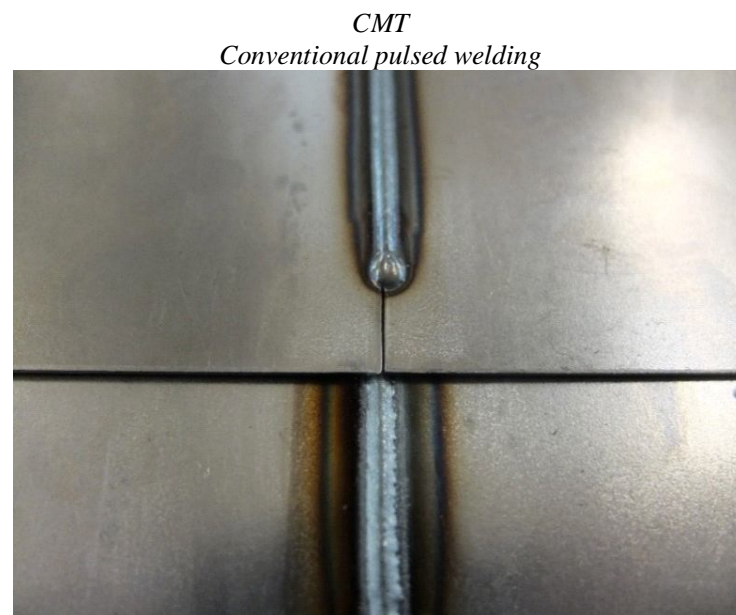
Upper side of the sample welded by synergic mode - pulse and CMT at 800 mm/min welding speed.
